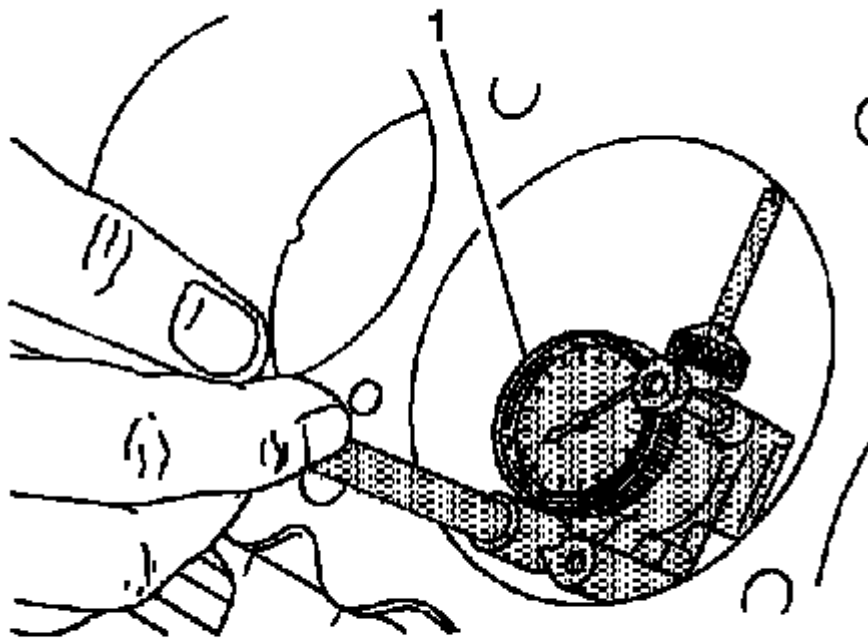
Inspect Cylinder Bores Using EN-8087 Gage
